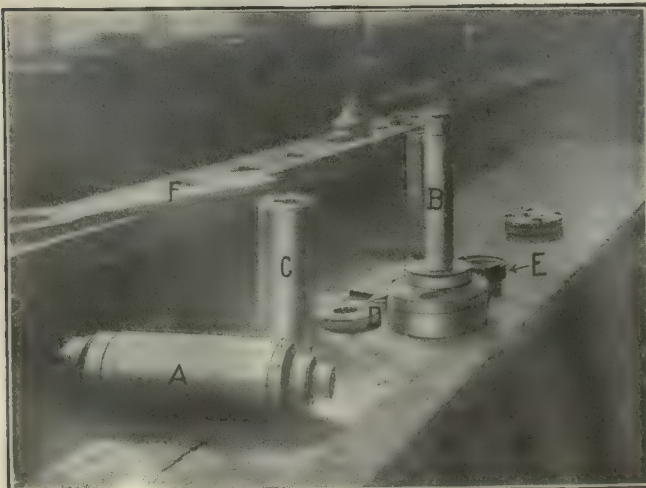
MANDRELS FOR GRINDING PERIPHERY
